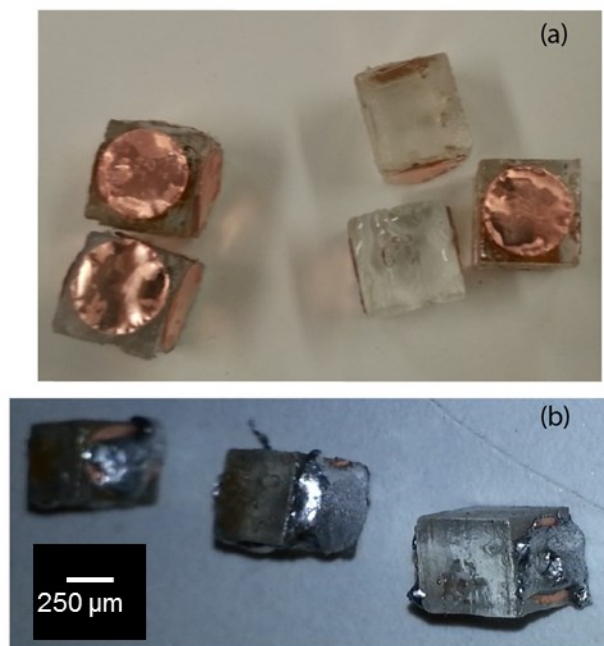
Improved Pattern for Shape Matching Self-Assembly. (a) PDMS cubes with the full circle pattern. (b) Uneven dip coating coverage and thickness on the full circle pyralux pattern.
